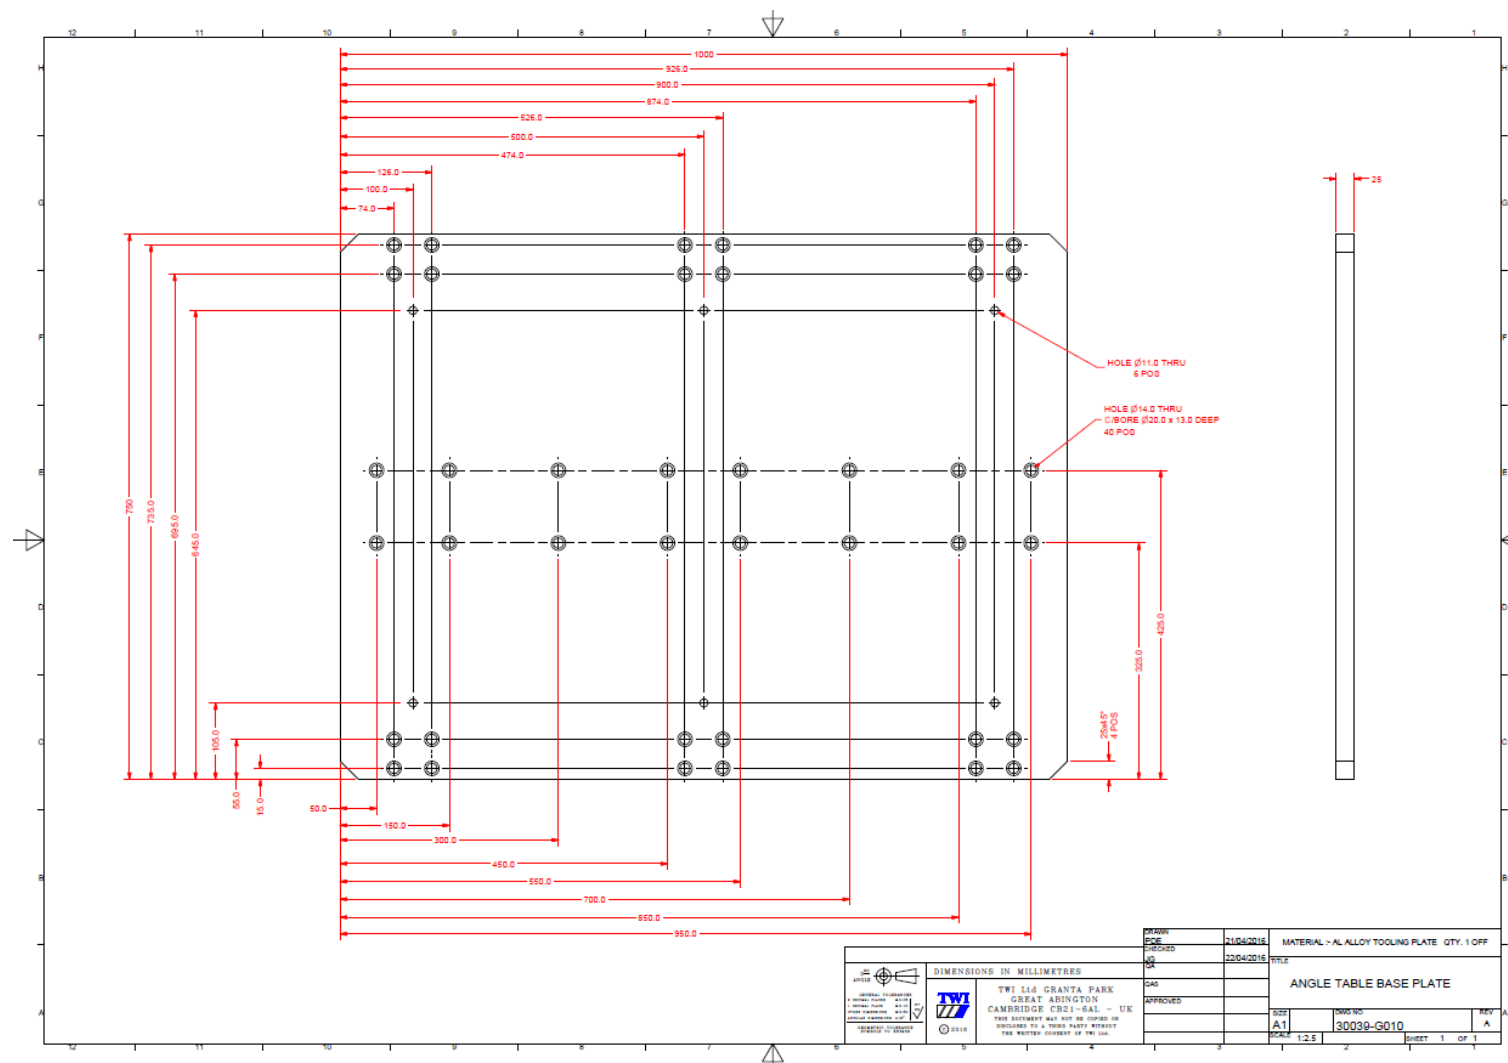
Technical drawing of the base plate of the tilting table.
